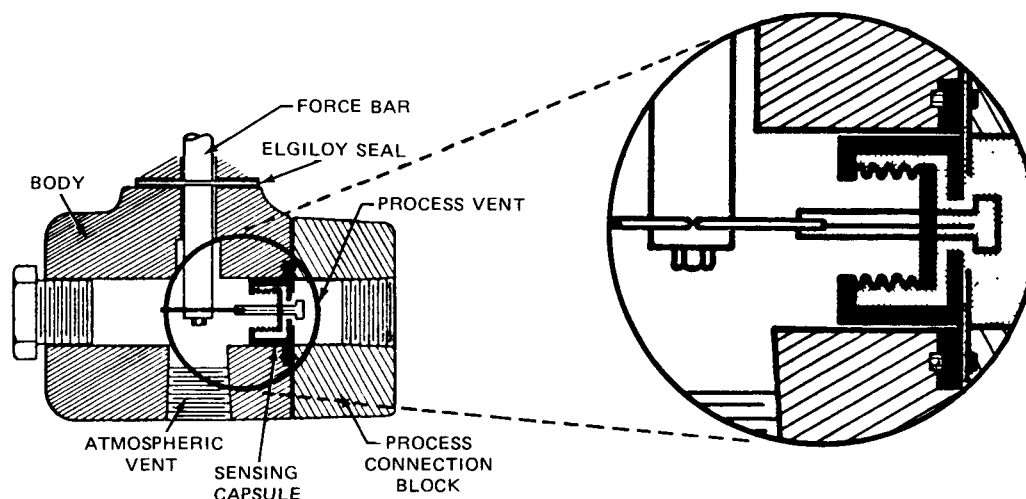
Sectional view of a force-balance pressure transmitter.
